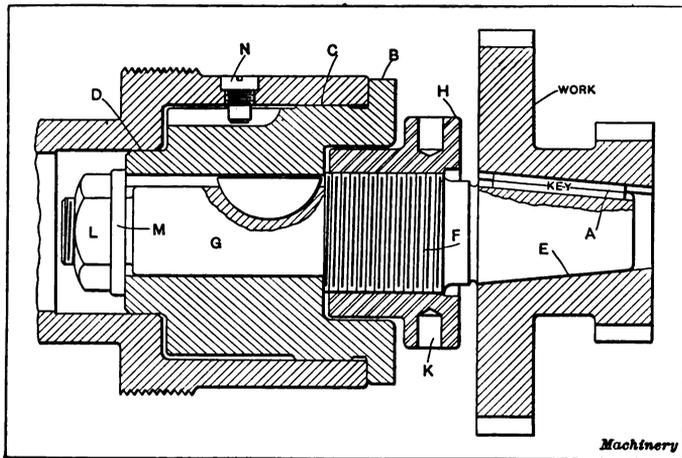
Taper Arbor mounted in Spindle and equipped with Nut for removing Work
